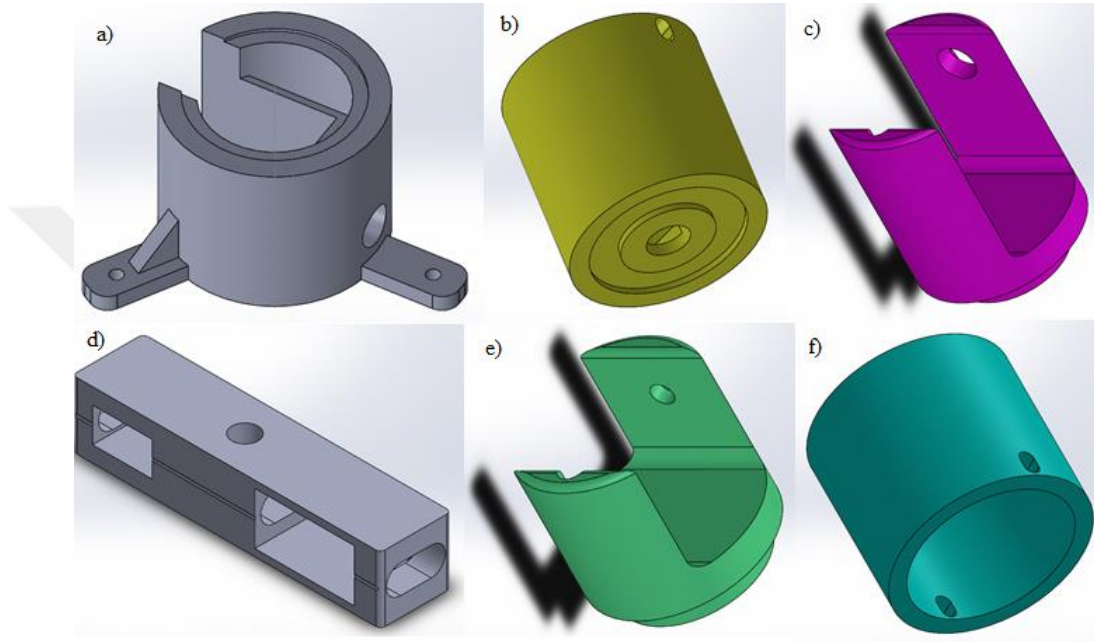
CAD models: a) Base and first joint, b) Joint offset, c) Second joint, d) Arm, e) Third joint, f) Arm.
